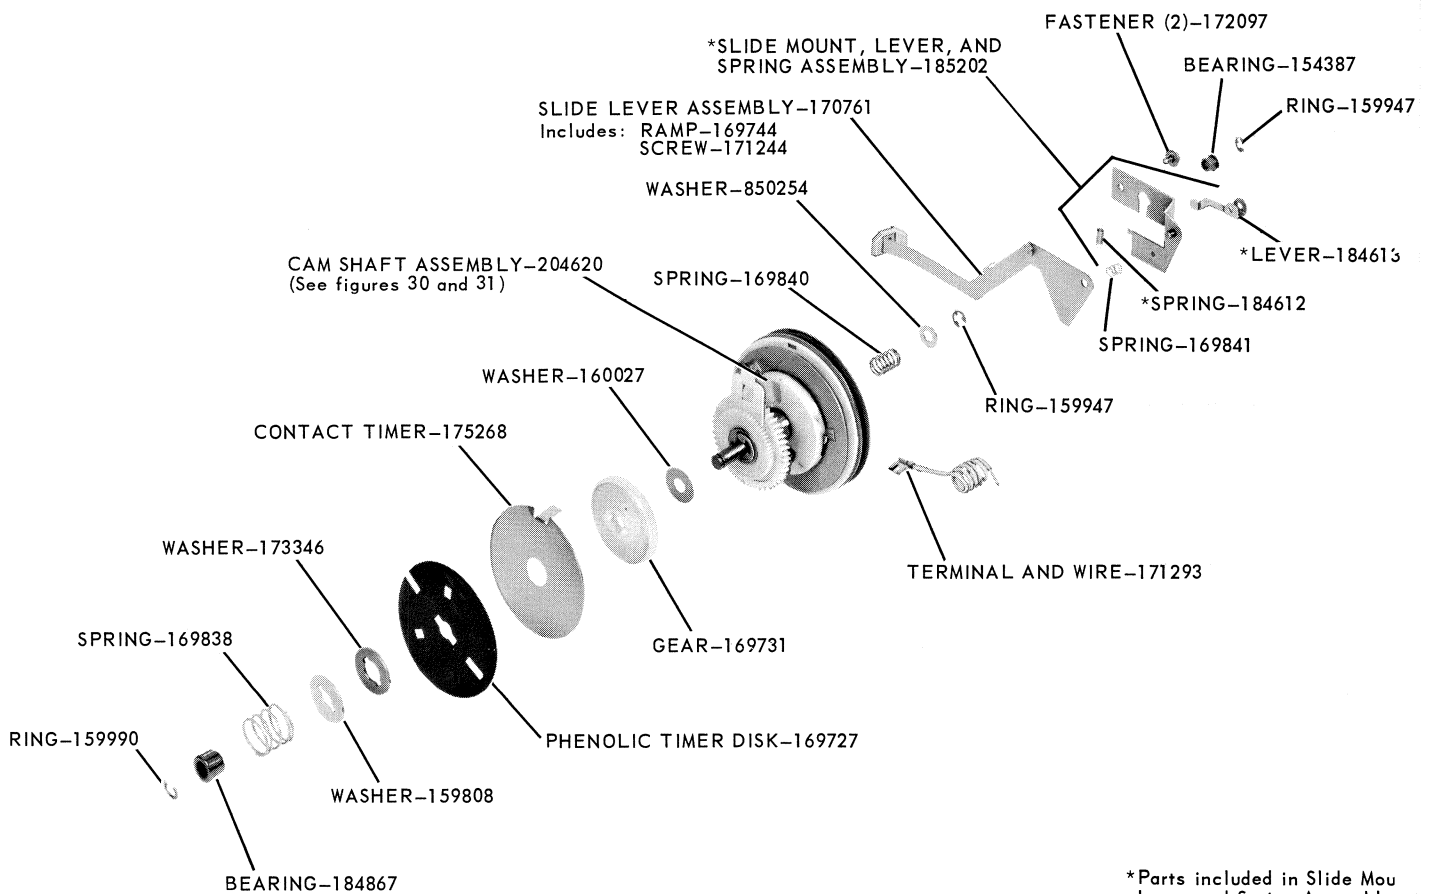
CAM SHAFT ASSEMBLY-170758
